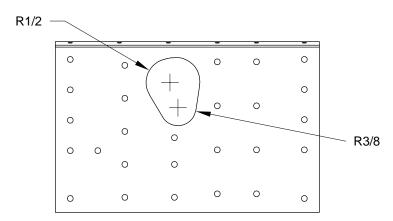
COPYING THE AILERON PUSHROD HOLE INTO W-1007D-L OUTBOARD REAR SPAR DOUBLER
